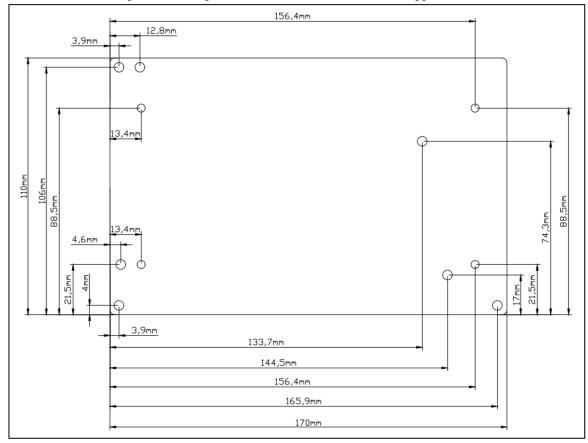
Mechanical dimensions of development board (fixed hole position)
